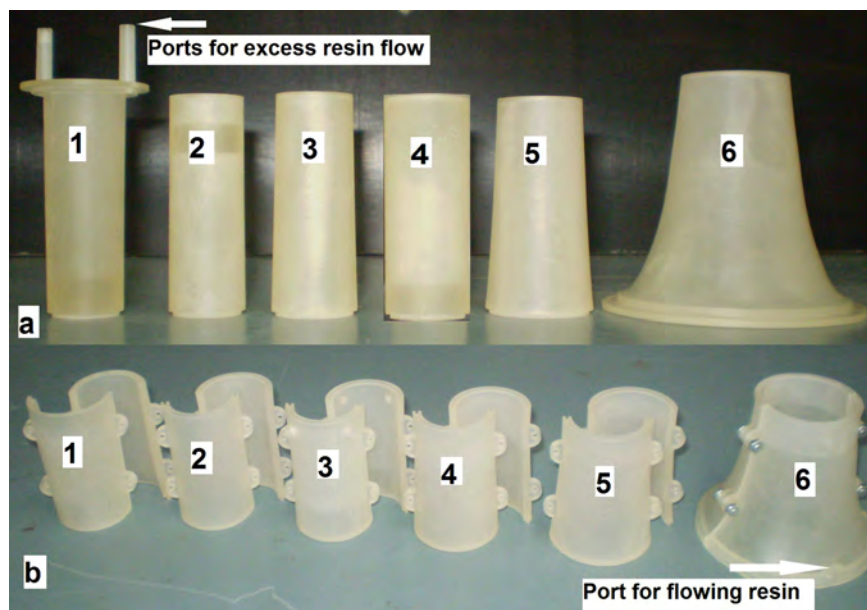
Photograph of the parts used to create the mould to cast the transparent duct: a. inner parts b. outer parts.
